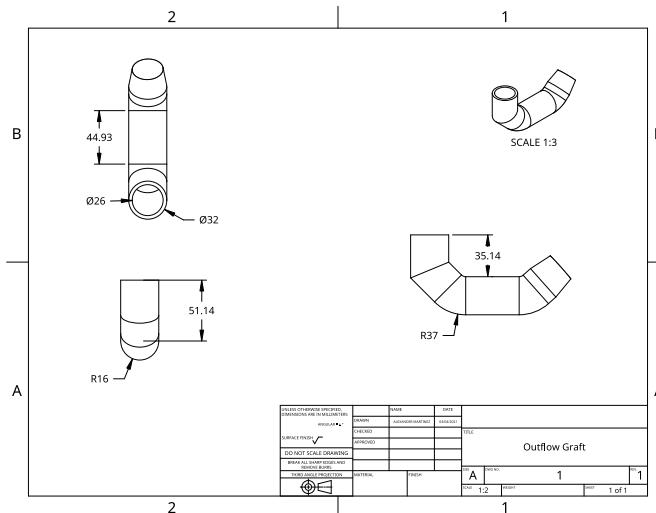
OUTFLOW GRAFT DETAIL DRAWING
